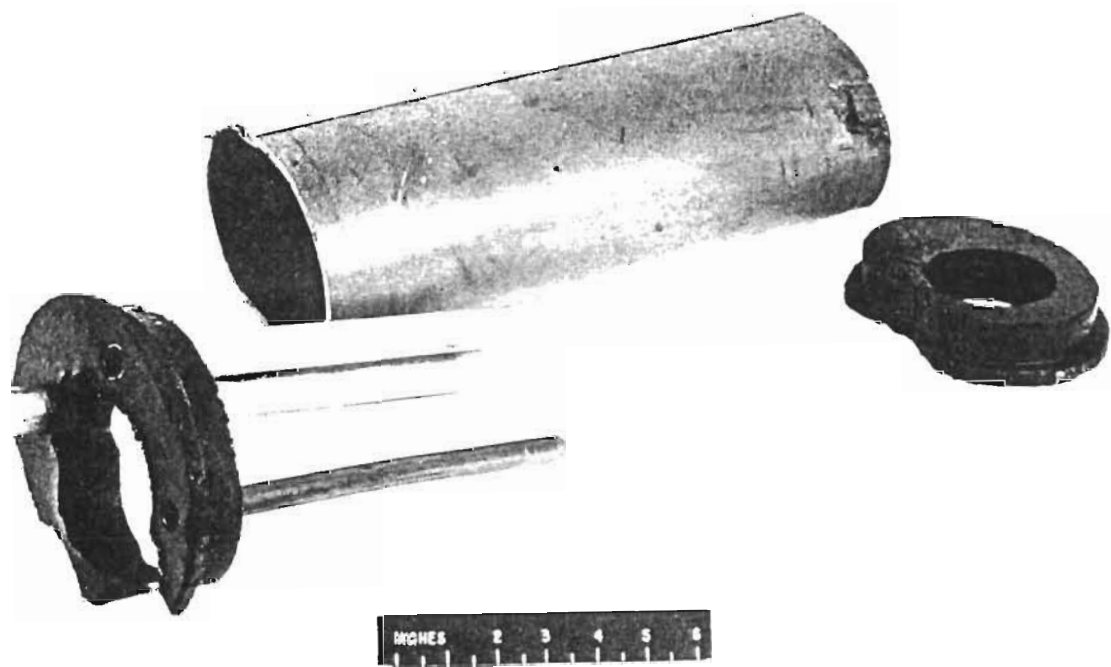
Jacket sleeve joined with aluminum fastener, end caps, and exhaust tubes.
